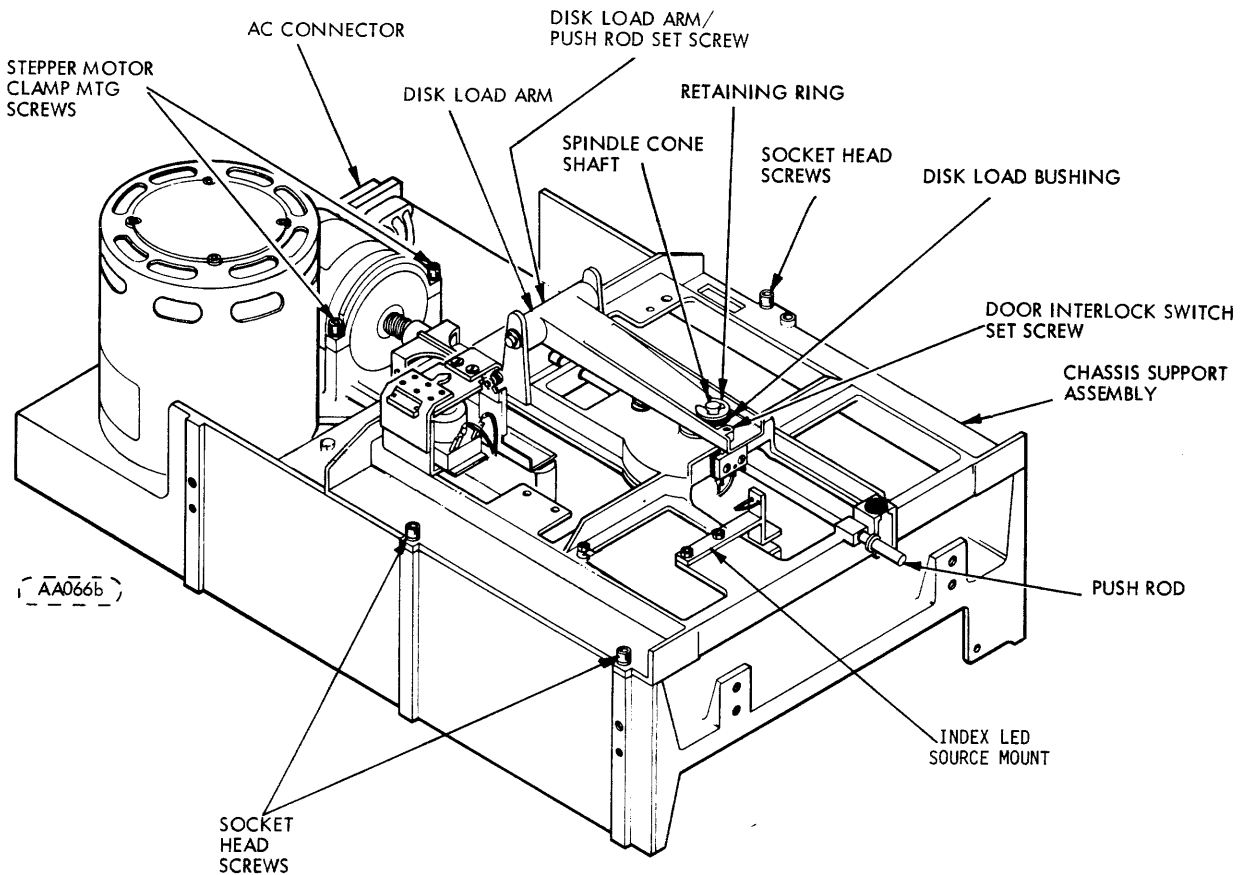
CHASSIS BASE ASSEMBLY
